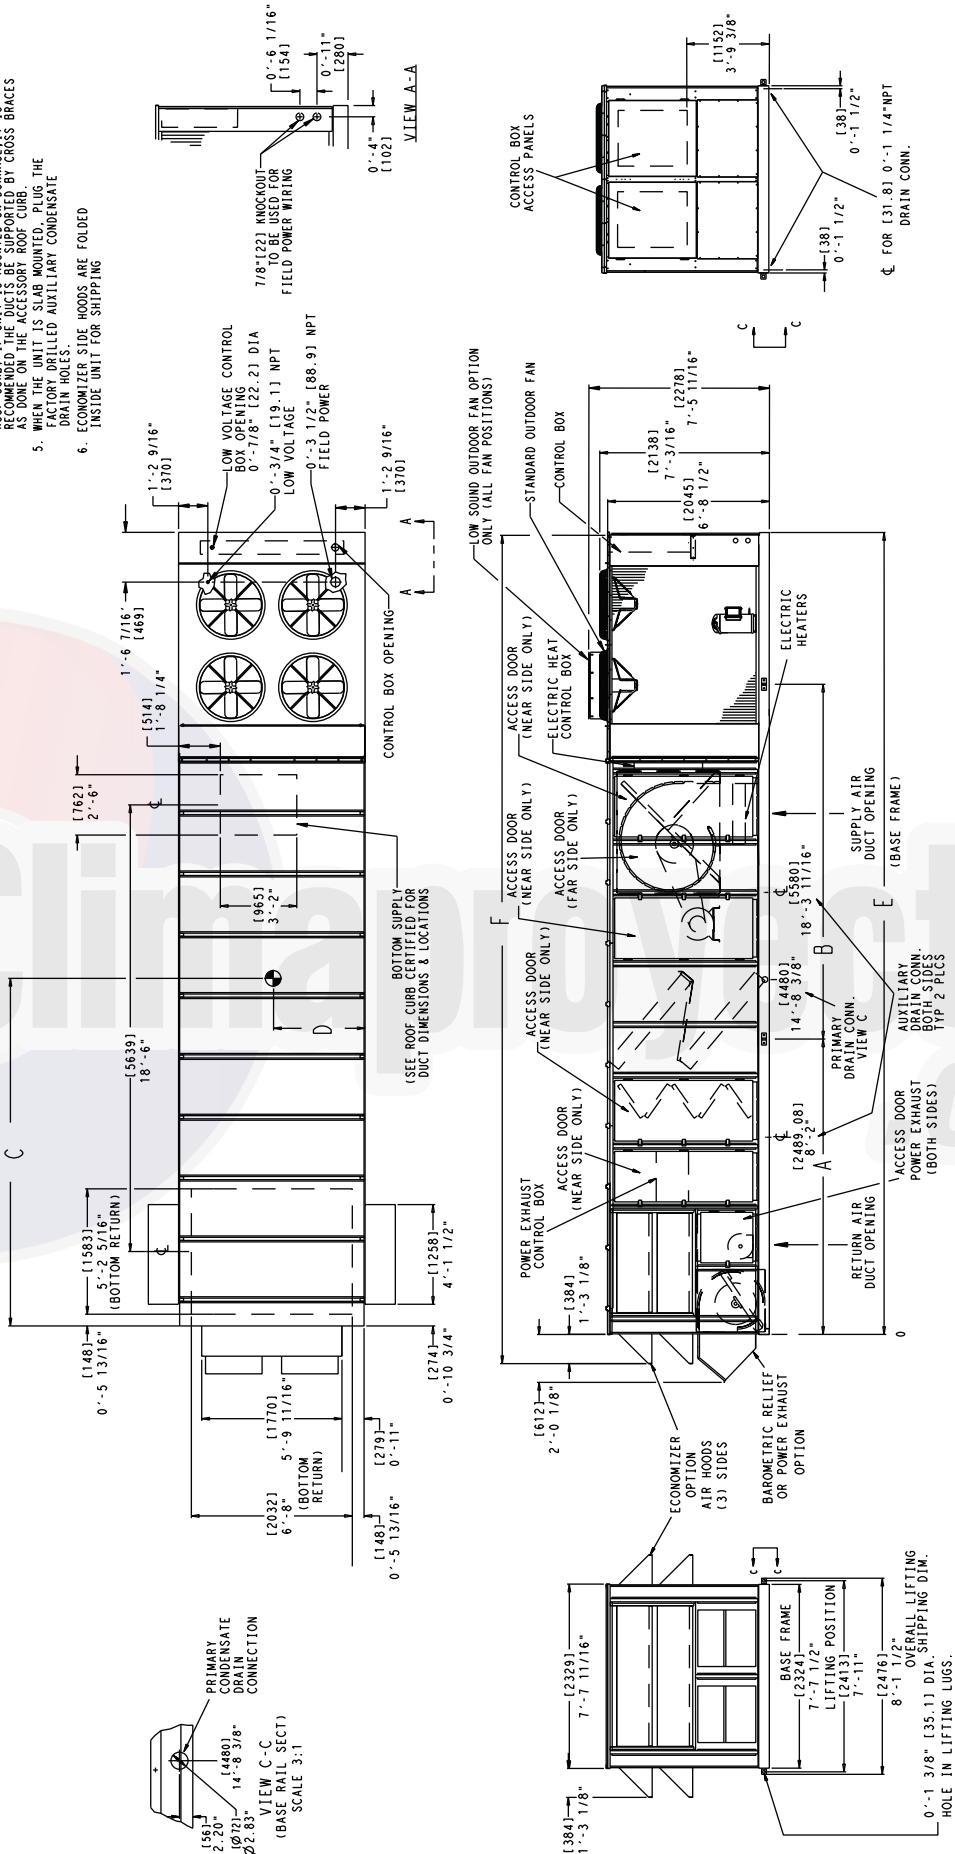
Base Unit Dimensional Drawing — 50P2,P3,P6,P7055,060 (Standard Chassis Unit Shown)
